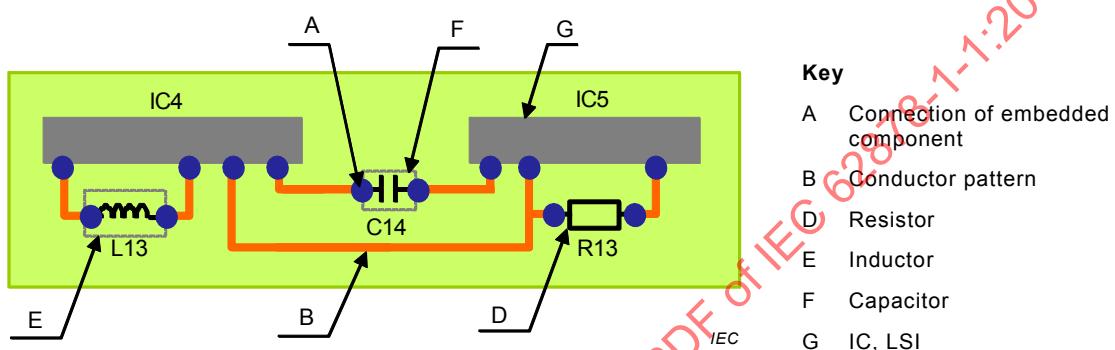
Circuit construction of embedded components having no connection terminal on the surface
